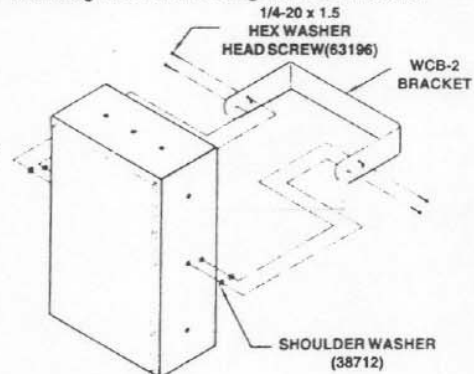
Mounting the FR10-2B Using the WCB-2 Bracket
